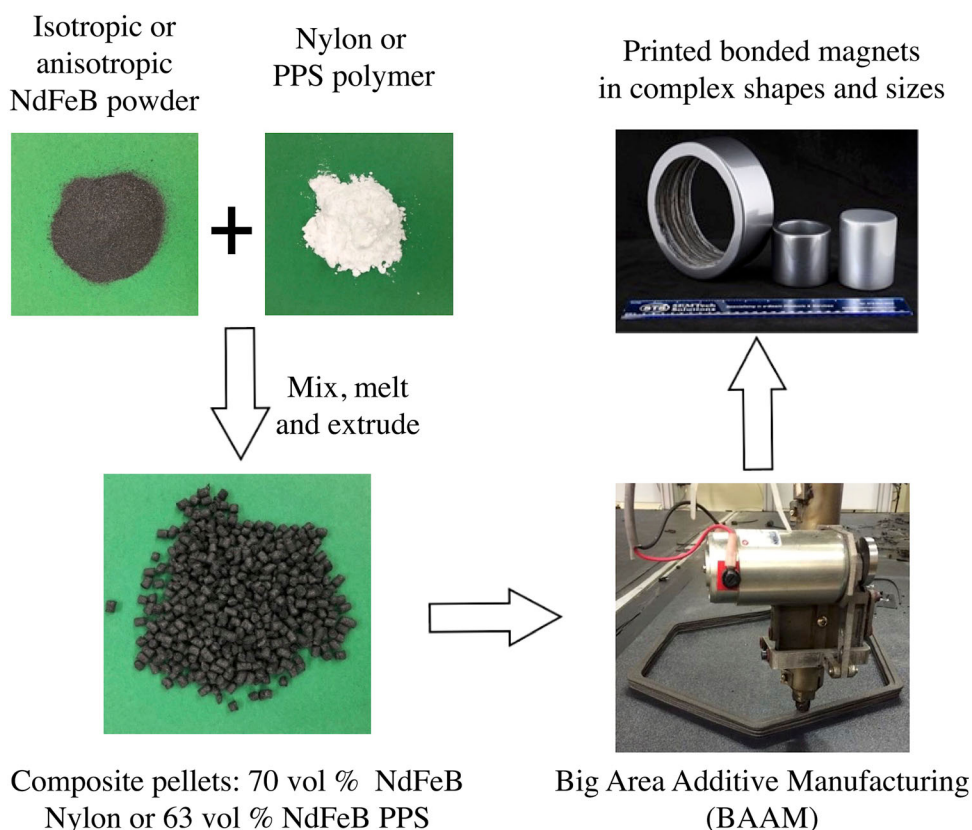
Schematic of big area additive manufacturing (BAAM) process. Composite pellets are extruded into Nd-Fe-B bonded magnets with complex shapes and sizes. Printed magnets are polished and painted to achieve the smooth texture on the surface. Reprinted from<sup>10</sup> under Creative Commons License CC BY.
